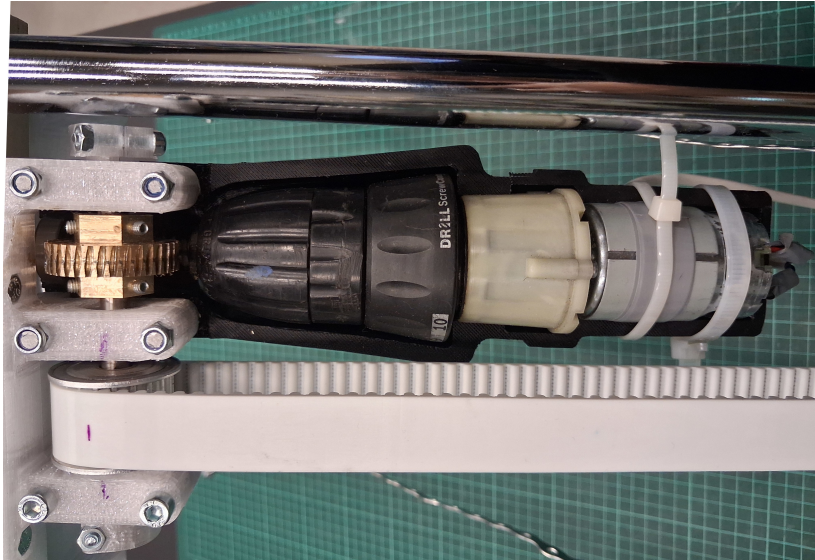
Battery drill motor with gearbox and chuck, custom made worm drive 1:36, HDT-5M 20 mm belt
